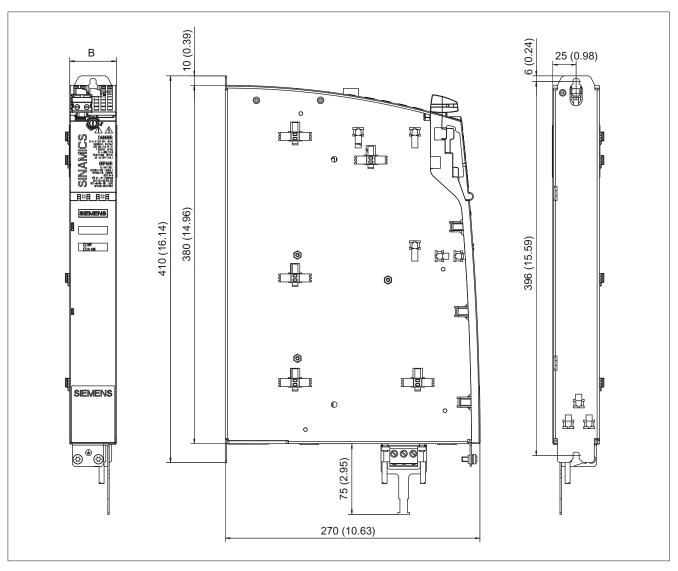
Dimension drawing of 5 kW and 10 kW Smart Line Modules with internal air cooling, all dimensions in mm and (inches)
